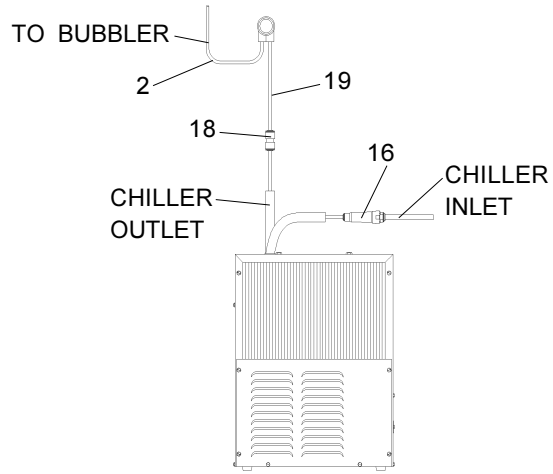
HTER-Q/HTSR-Q Tube Routing
